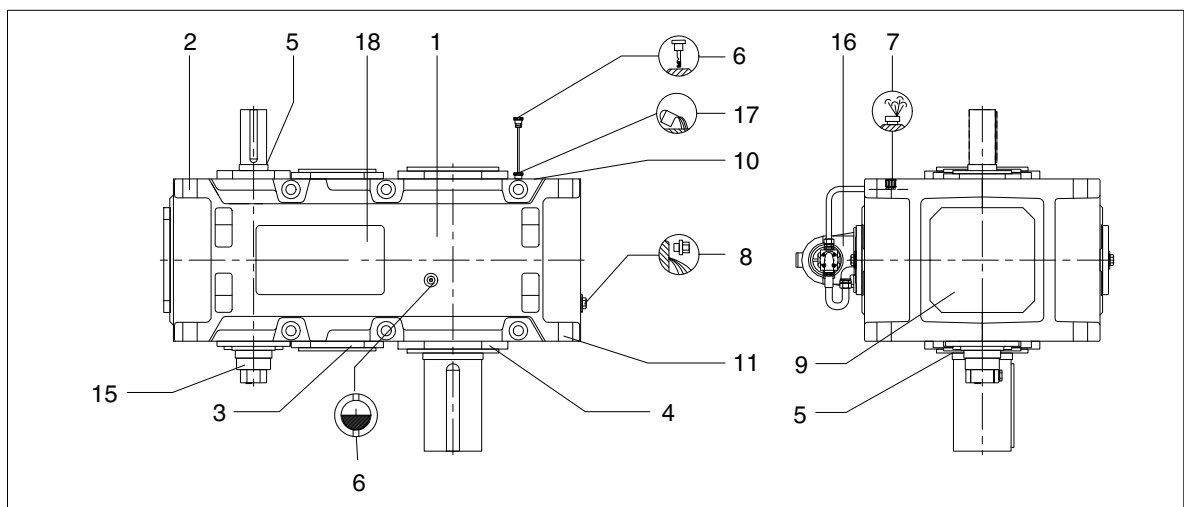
Gear-unit features on gear units type H..V with add-on oil-supply system
